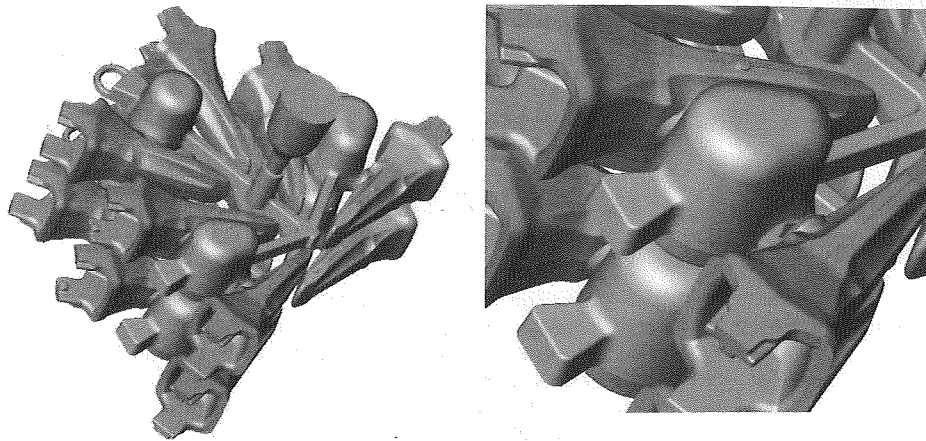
Sand gravity casting; CAD geometry of the foundry system
